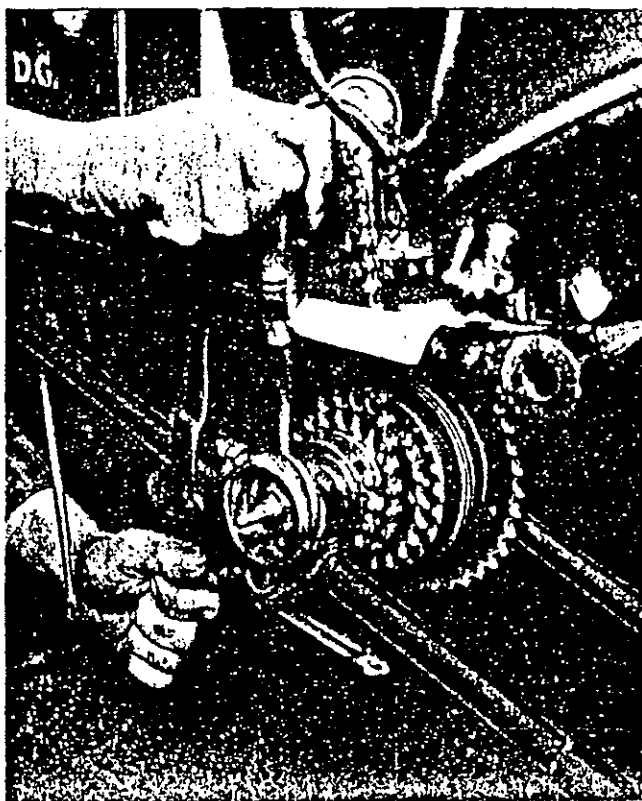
CONNECTING UP KICK-STARTER CHAIN.
